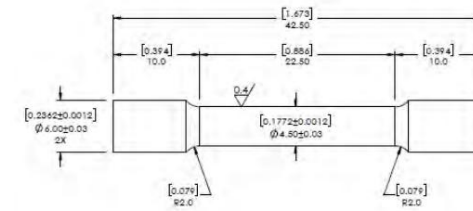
Machined Metal AM (4 mm) Tensile Bar Without Threads
